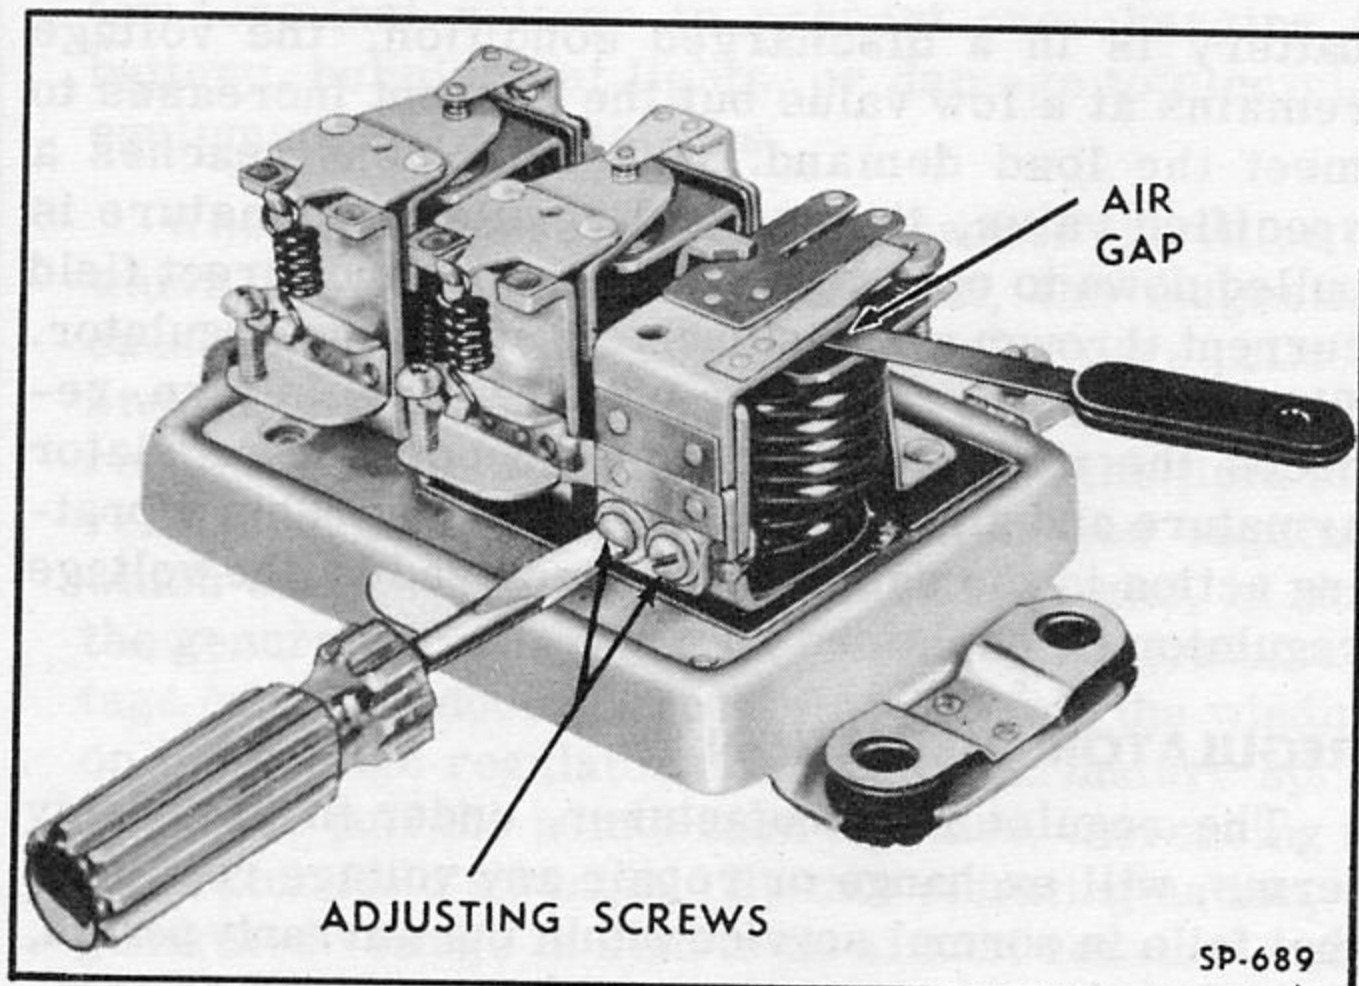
Adjusting Delco-Remy Cut-Out Relay Air Gap
